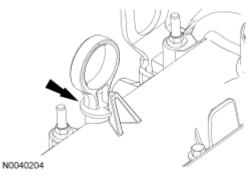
Locating Oil Level Indicator Courtesy of FORD MOTOR CO.
